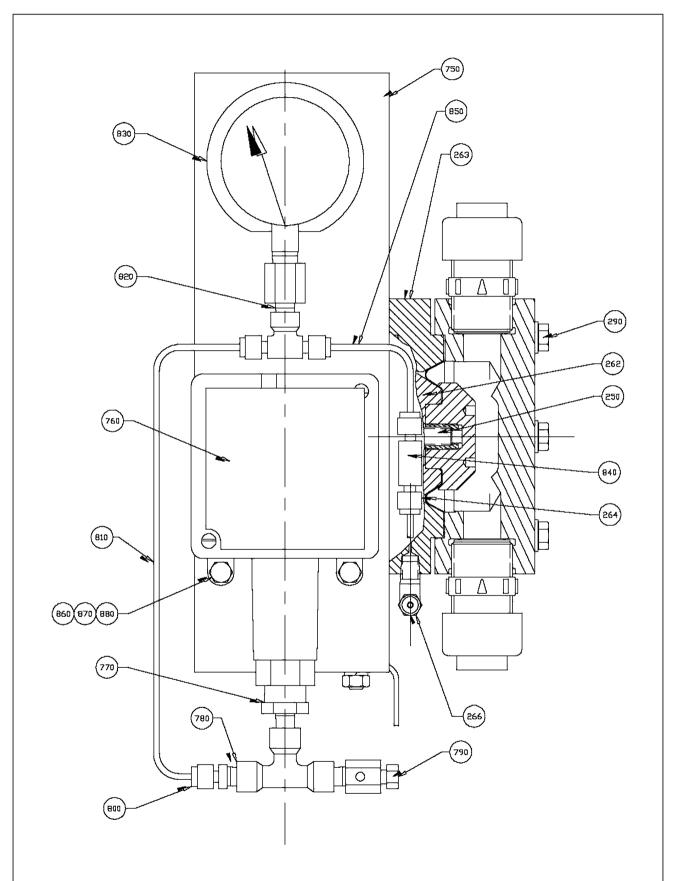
GM DOUBLE DIAPHRAGM LEAKAGE DETECTION WITH PRESSURE GAUGE AND SWITCH SECTIONAL VIEW
